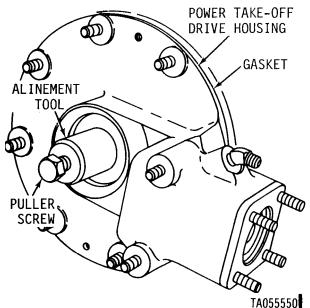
Installing power takeoff drive housing using alinement tool, model AVDS-1790-2DR engine.
